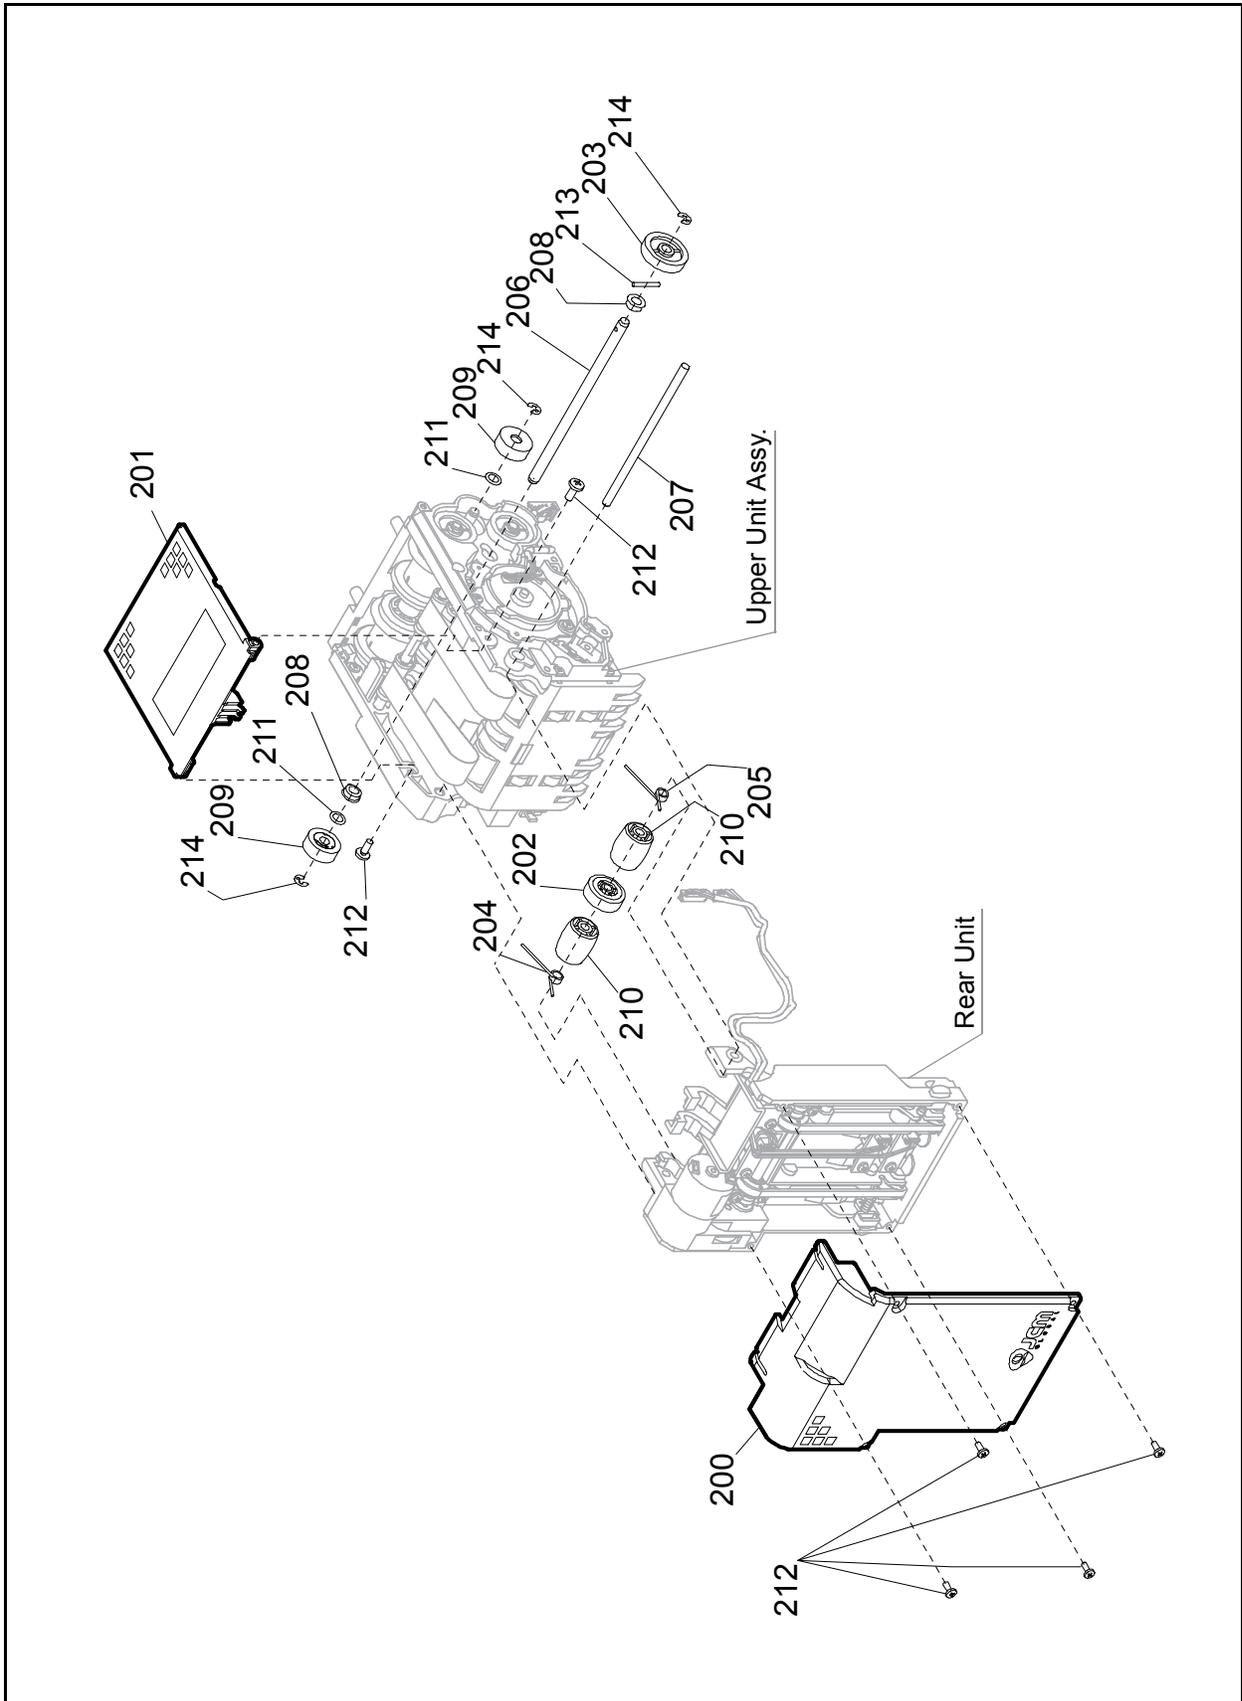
VEGA-RC Twin Upper and Rear Unit Exploded View
